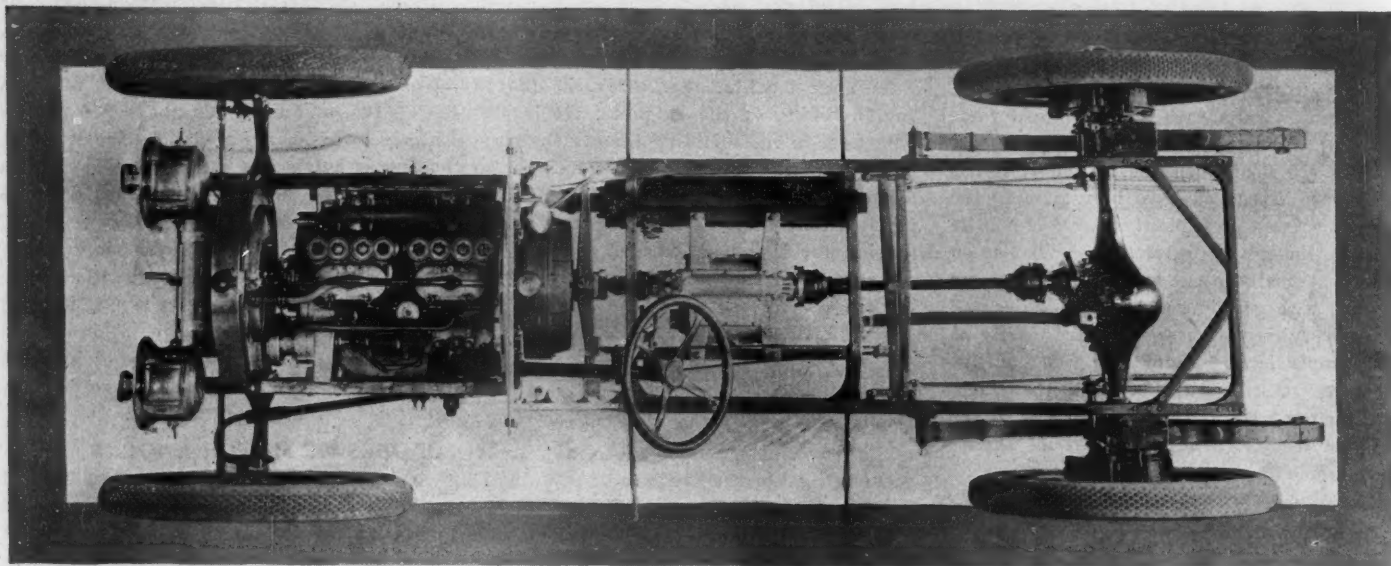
OWEN CHASSIS WITH LEFT-HAND STEERING CONTROL
